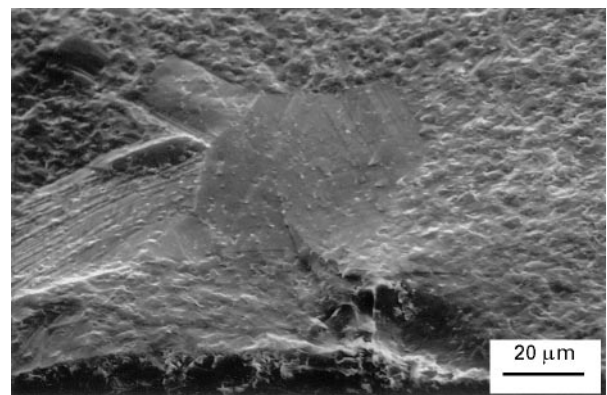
B_4C initiation from a machining flaw and nearby larger grains. The machining flaw (bottom right of centre) is not nearly large enough to be the origin of failure at MPA (54.2×10^3 p.s.i.), but a flaw encompassing the machining flaw plus the two large grains above and to the left of the machining flaw is (point c of Fig. 9).
